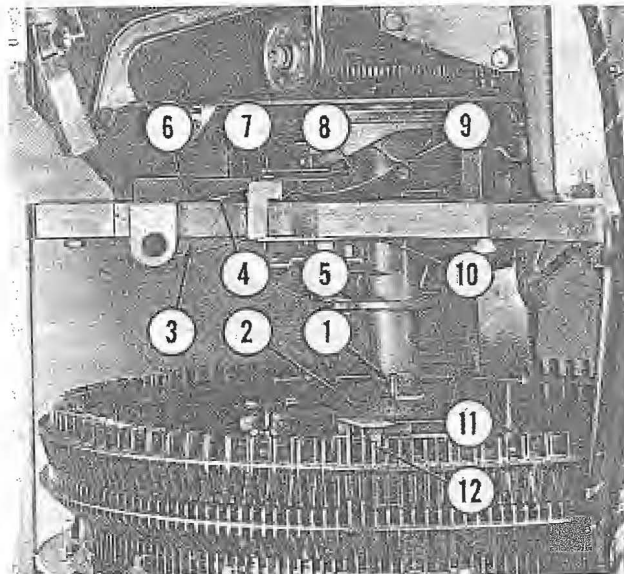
CANCEL LEVER ADJUSTMENT, 2400
